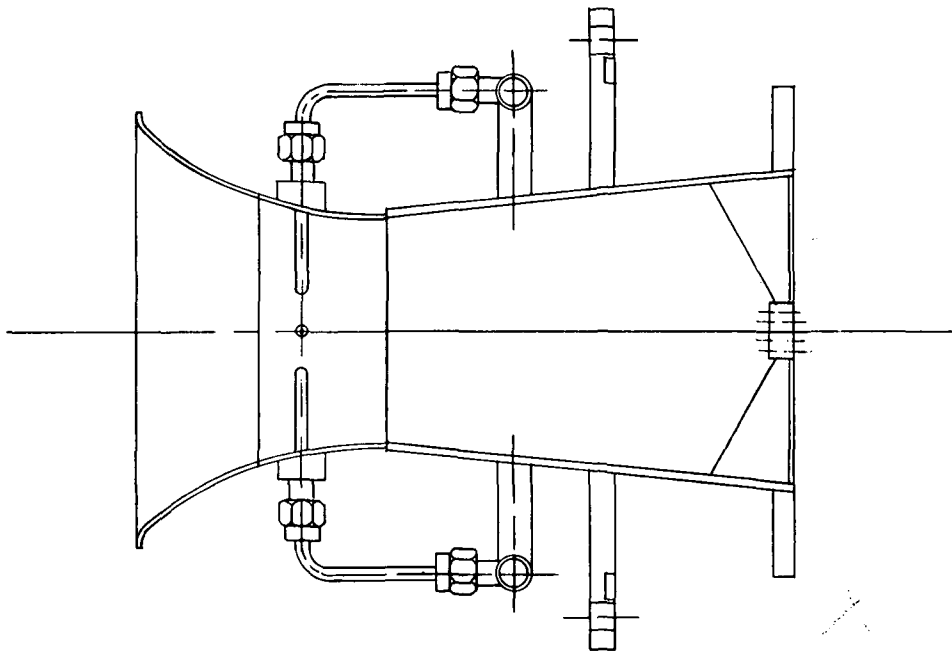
Revised Premix Tube Design Incorporating "Spoke" Fuel Injector
